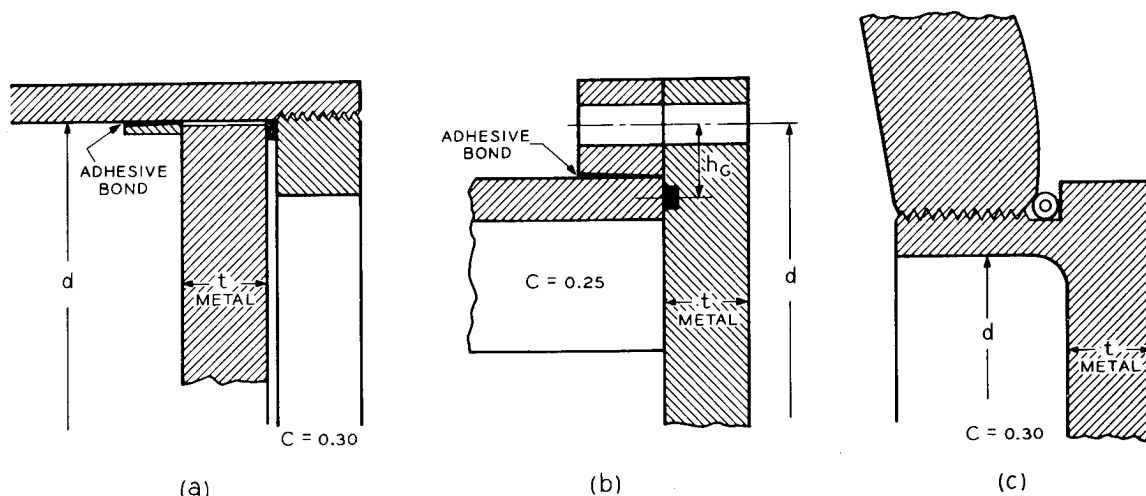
ACCEPTABLE TYPES OF FLAT METAL HEADS
